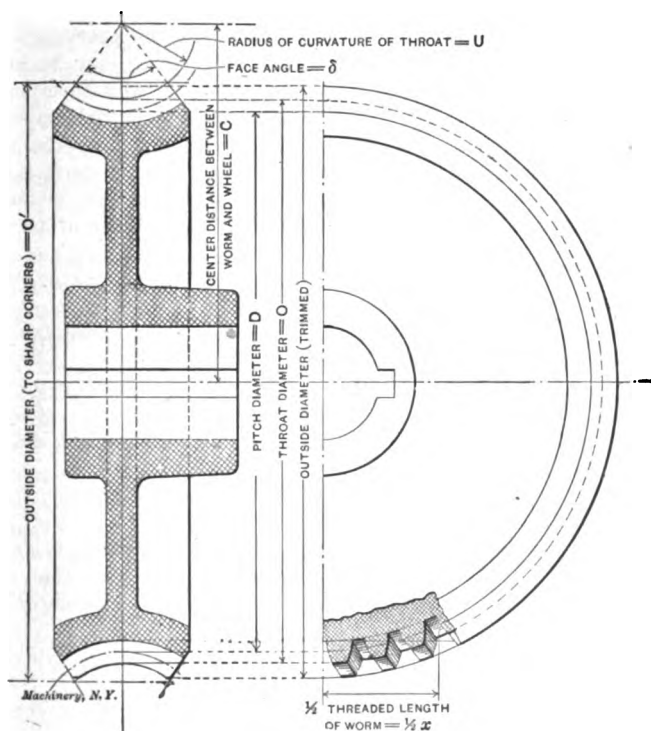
Nomenclature of Worm-wheel Dimensions.
